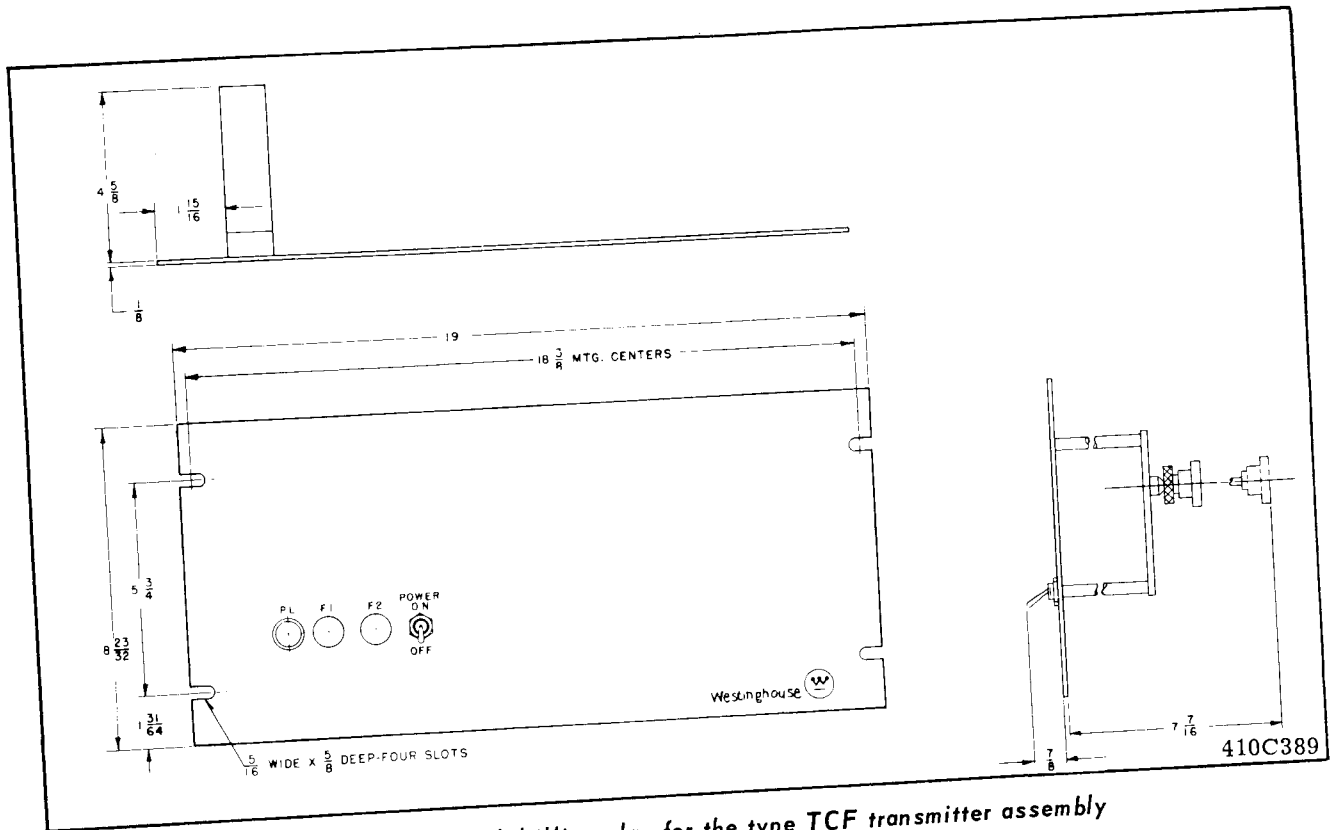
Outline and drilling plan for the type TCF transmitter assembly
